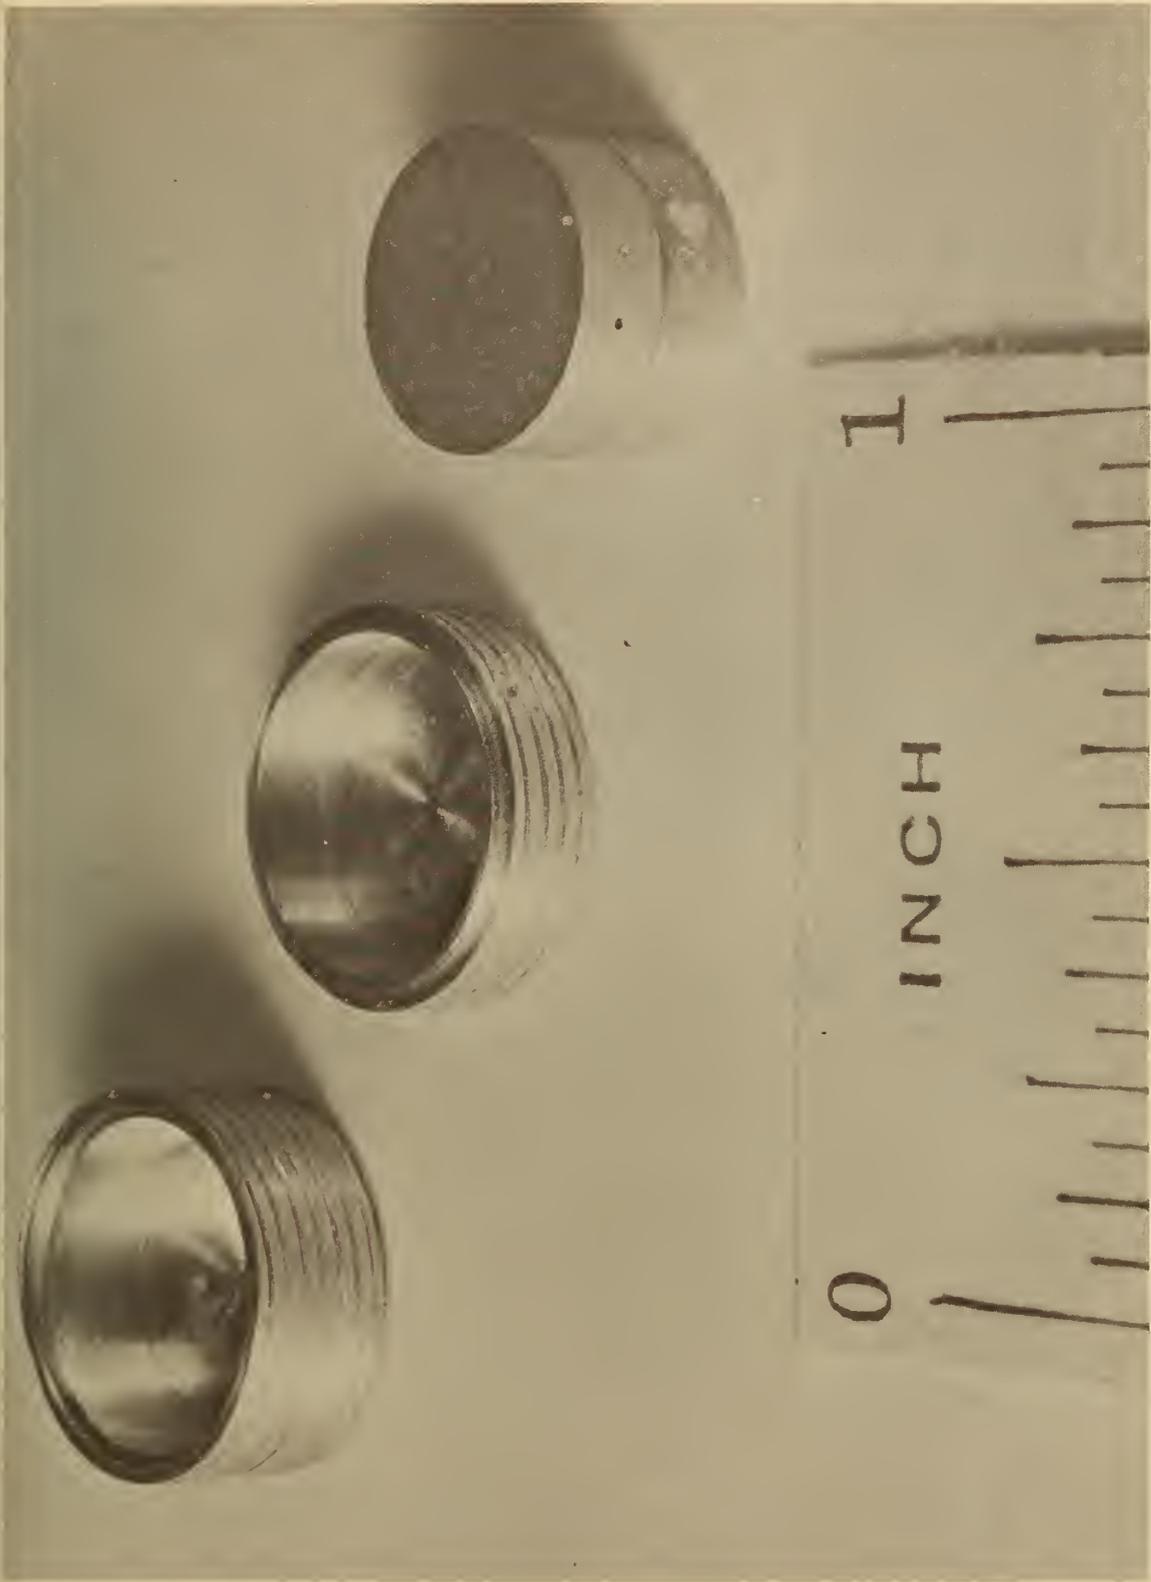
Aluminum calorimeter. Shield and core before assembly.
